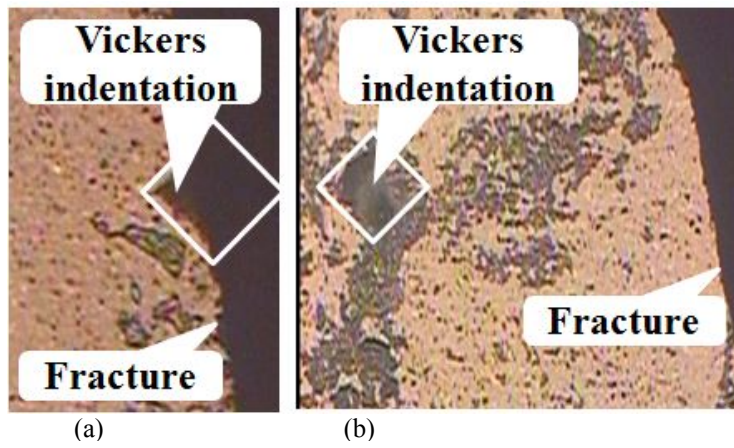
Fracture patterns fractured from (a) crack-healed zone, (b) outside of crack-healed zone (SSTS-1 specimen)
